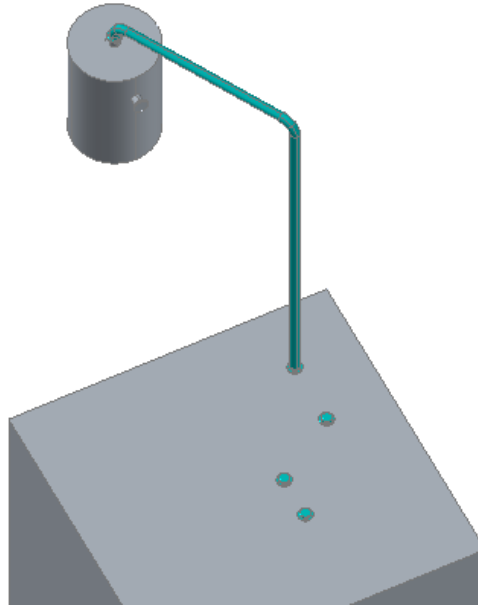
Pipe added between outlet nozzle of the Evaporator unit and right radial nozzle of the Boiler Drum
